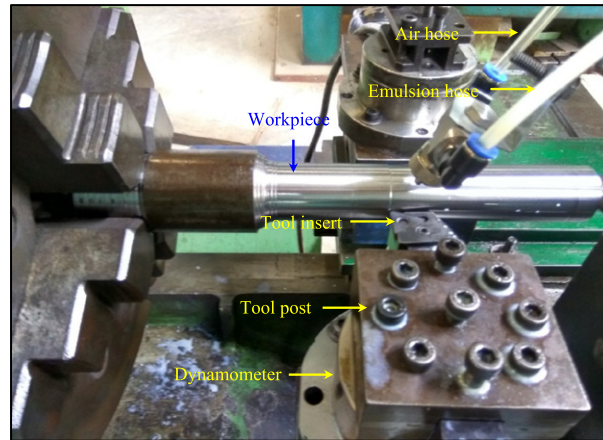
Tool-workpiece-mist interaction region during machining with minimum quantity cutting fluid technique.
